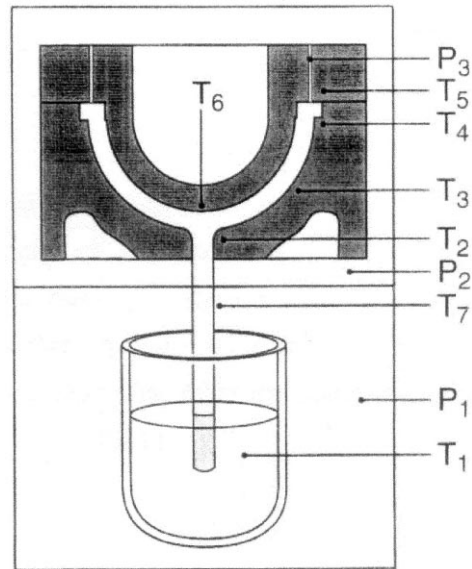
Location of the measurement sensors in the mould and casting unit.
